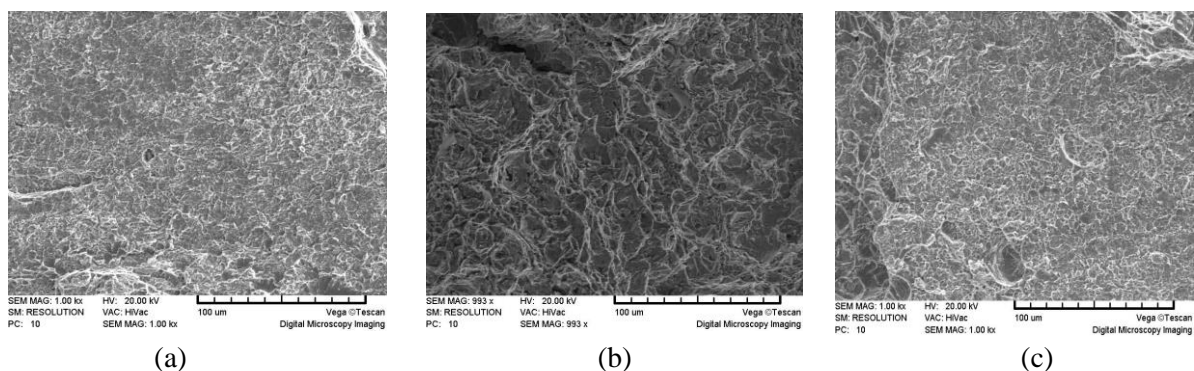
The rupture appearance of aged for 2000h: (a) the welding zone, (b) the heat affected zone, (c) the base metal
